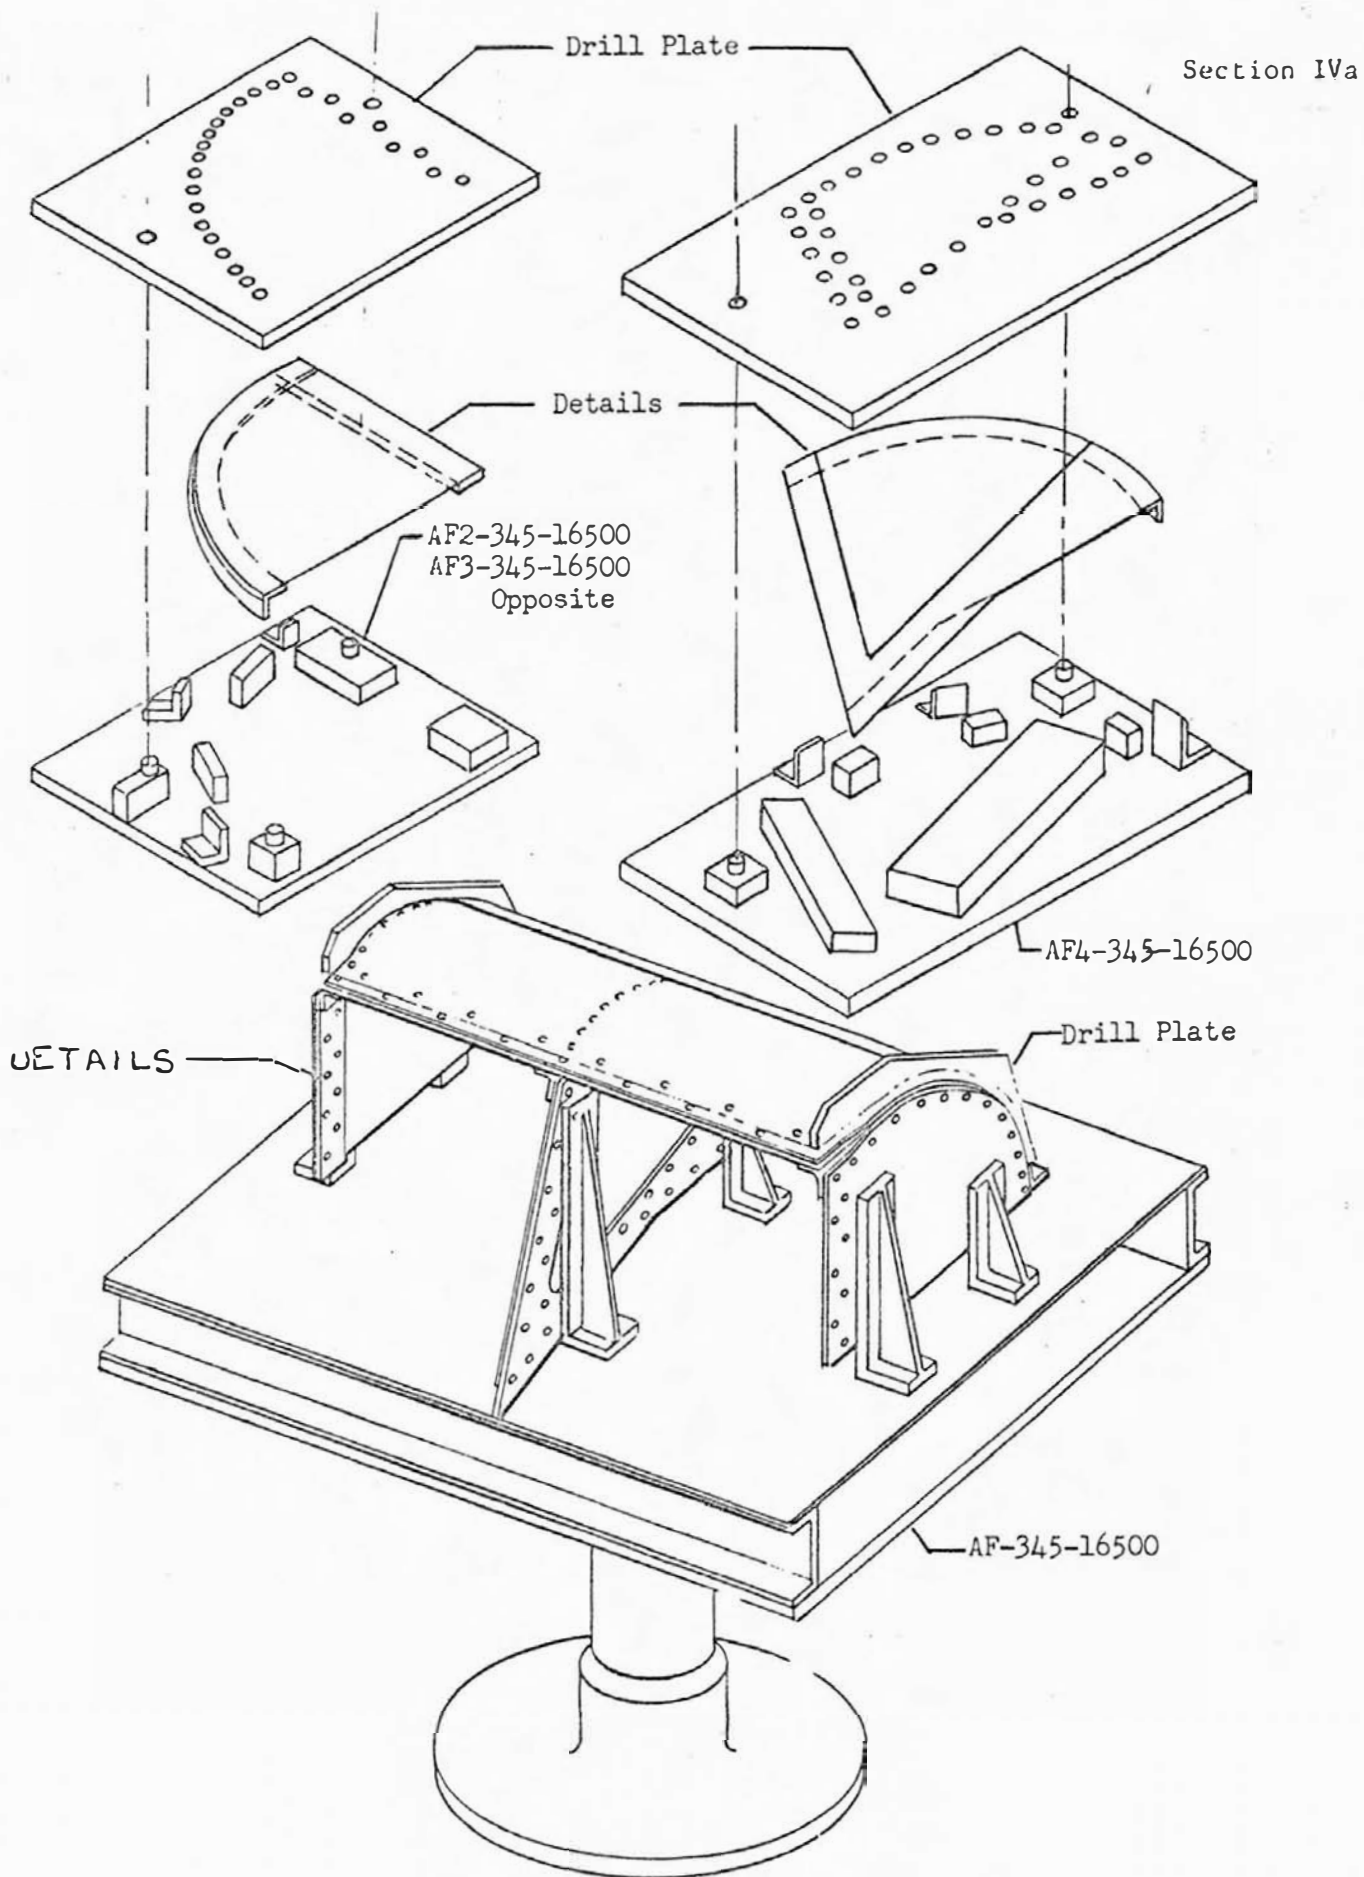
11. Air Scoop Assembly and Assembly Fixture
